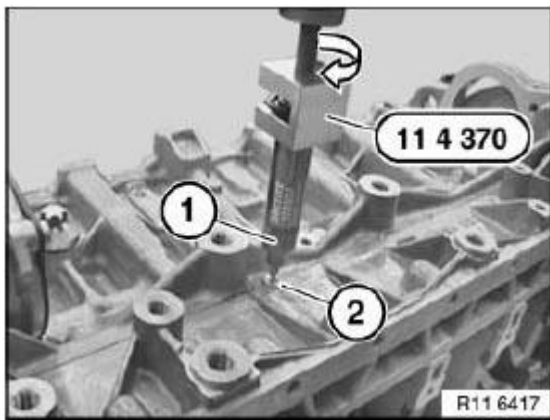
Inserting Liquid Gasket With Special Tool 11 4 370
